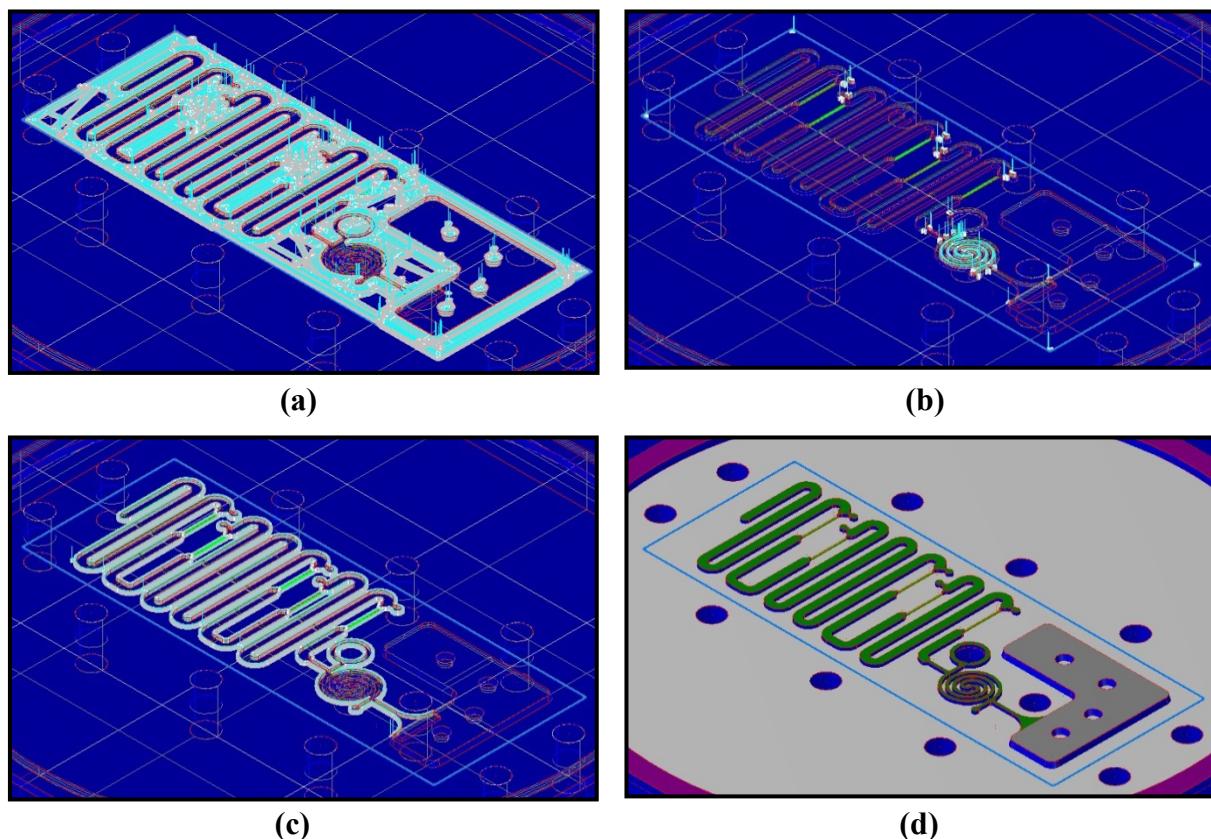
Schematic diagrams of the tool-paths created for fabricating the master mold with CNC milling: (a) Tool-paths for 800 μm diameter end-mill to create the reagent chambers; (b) Tool-paths for 300 μm diameter end-mill to create the spiral reaction chamber; (c) Tool-paths for 2° draft angle on the perimeters of the microchannels; and (d) Final shape of the fabricated master mold with the above tool-paths.
